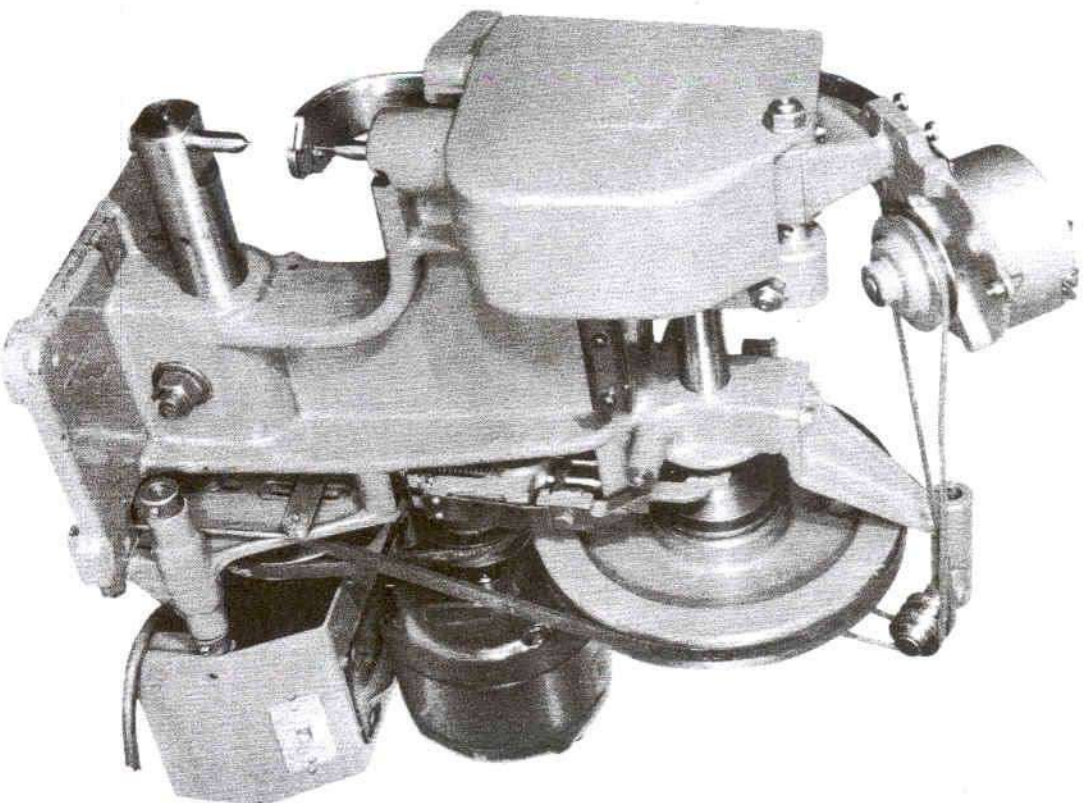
USMC Eyeletting Machine-Model G. Front-right View
